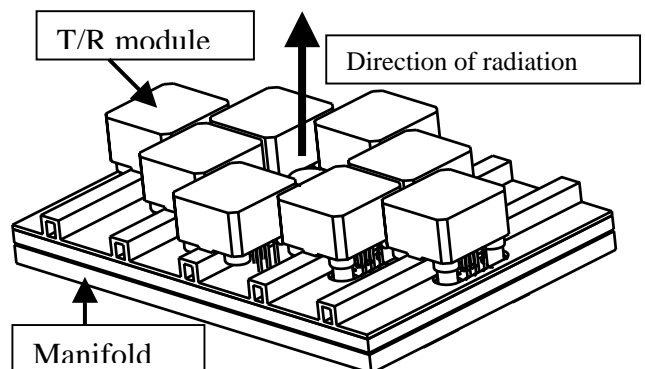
A sketch of a tile-shape antenna architecture. The module (package) may not have heat sinks. [6]
